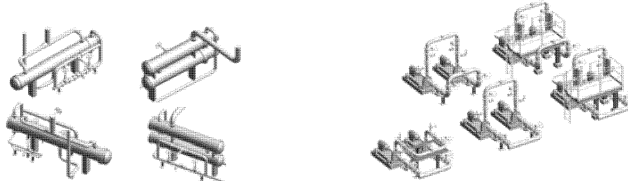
Shell and tube heat exchanger structural group-modules (left side) and pump structural group-modules (right side) in various layouts and applications.
